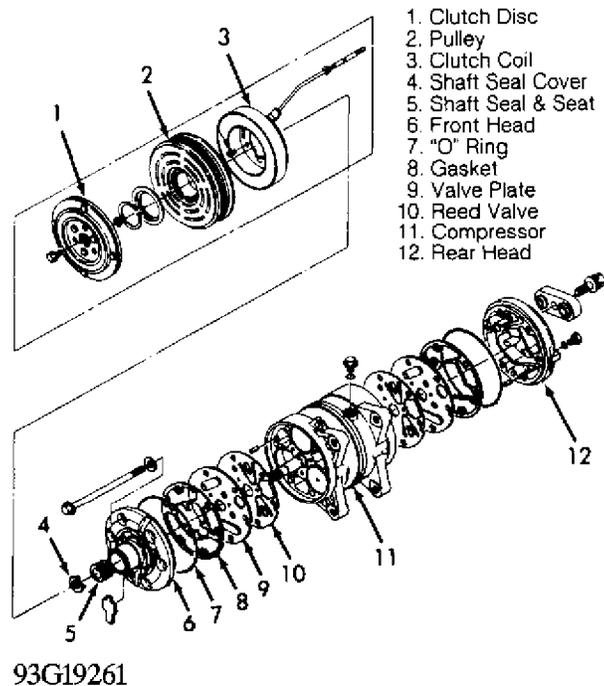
Exploded View Of Compressor (Diesel Kiki 6-Cylinder)
